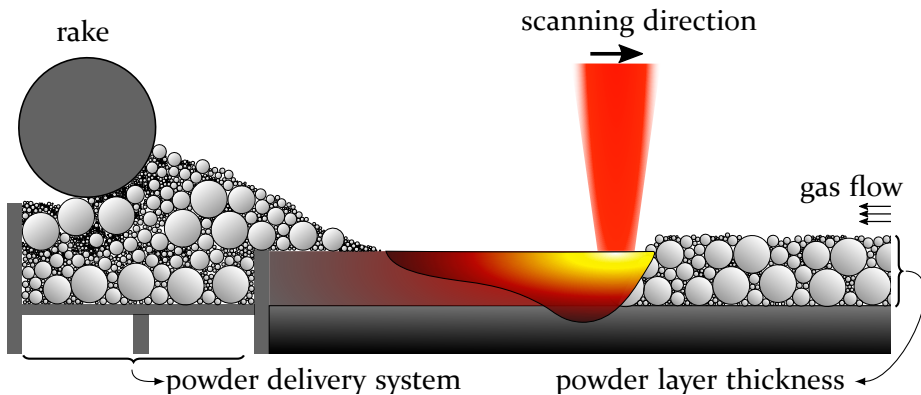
Sketch of the SLM process. Metal powder is dispensed using a rake and melted using a laser beam. Layer-by-layer, a three-dimensional object is manufactured due to the fusing of metal powder.
